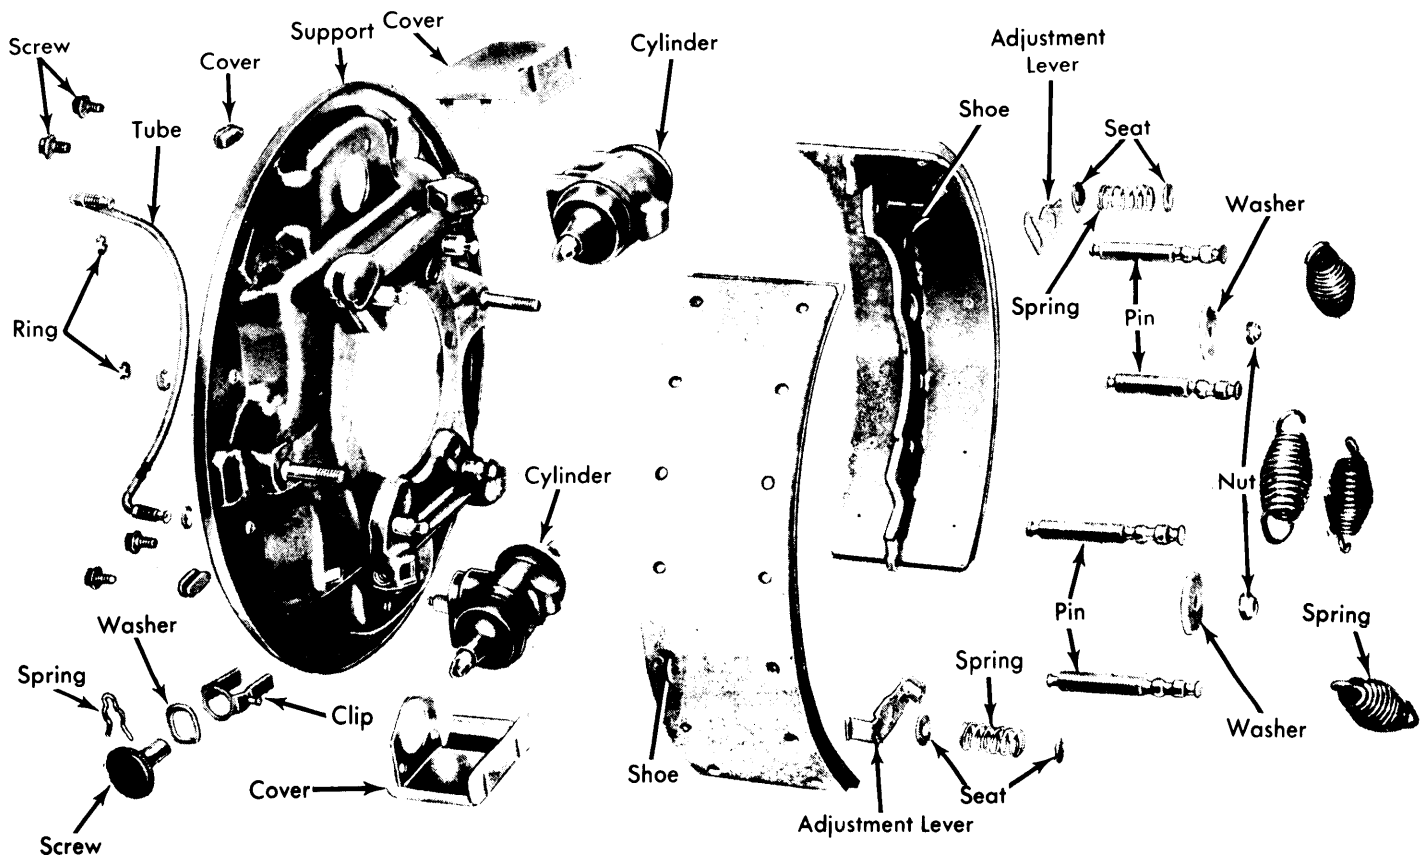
Exploded View of Dual Cylinder Floating Brake Shoe Assembly
